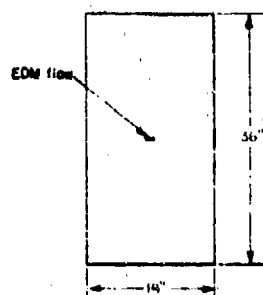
SHEET FRACTURE TOUGHNESS SPECIMEN
